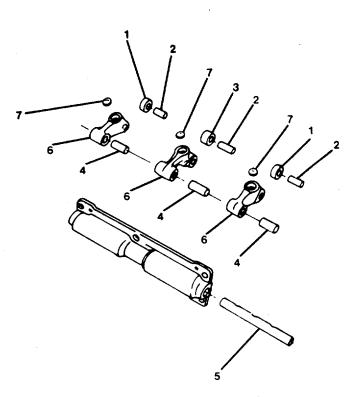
<u>Cam Follower Housing Group (Push Rods Removed) with</u>
